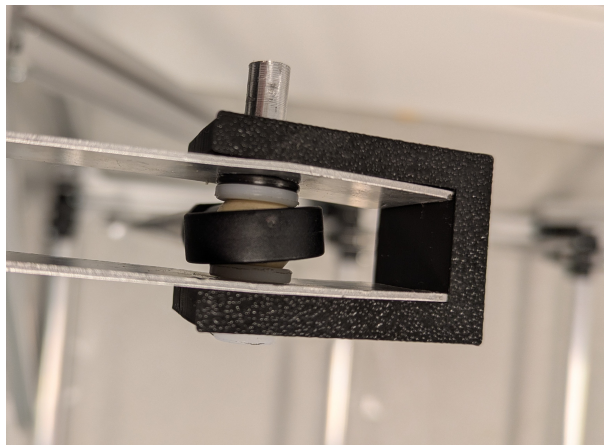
O-ring installed between the slide bearing and the rod end to eliminate axial play on the axle.
